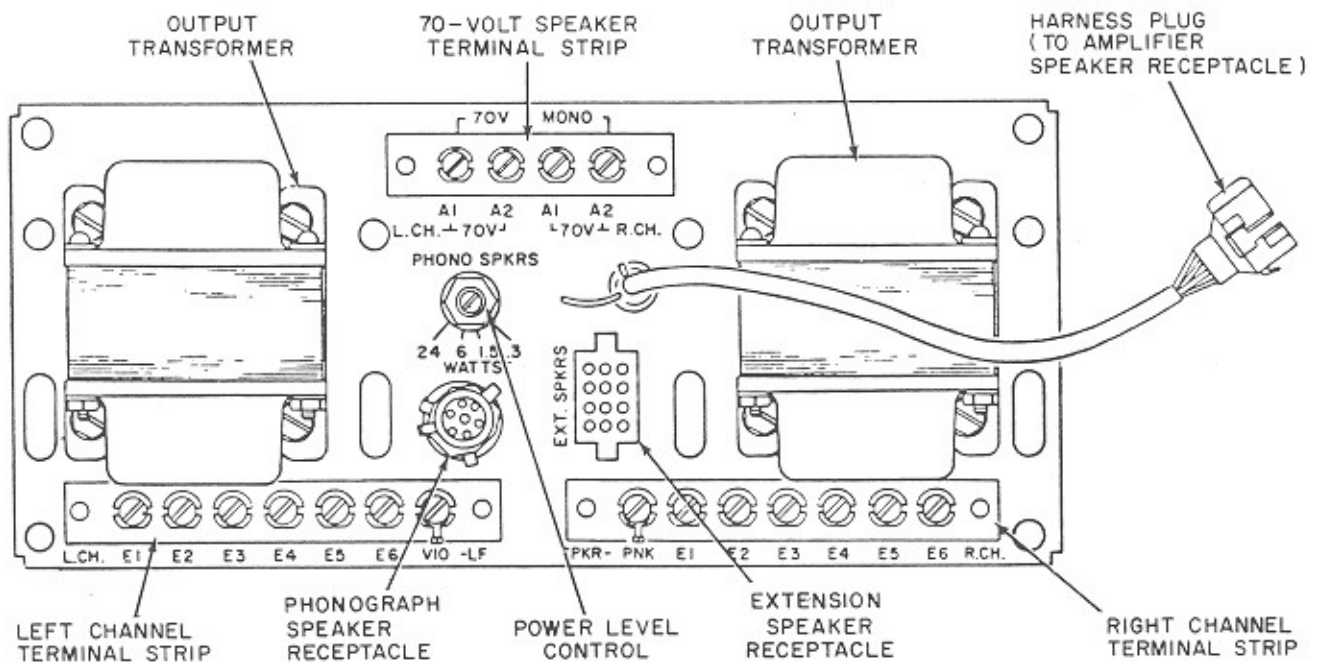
TRANSFORMER ACCESSORY PACKAGE
